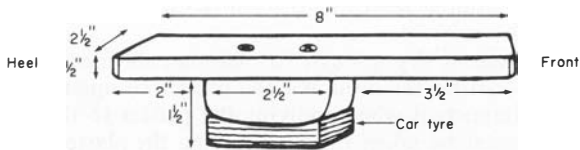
A wooden rocker (showing dimensions) shod with car tyre.
